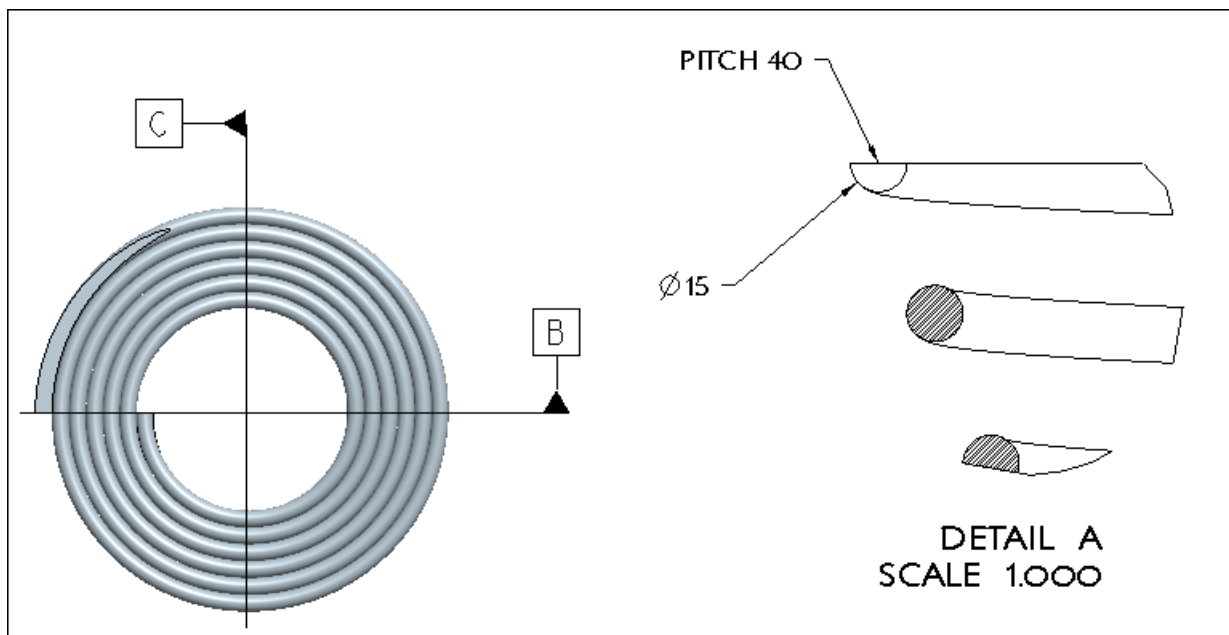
(b) Helical Compression Spring Drawing: DETAIL A
